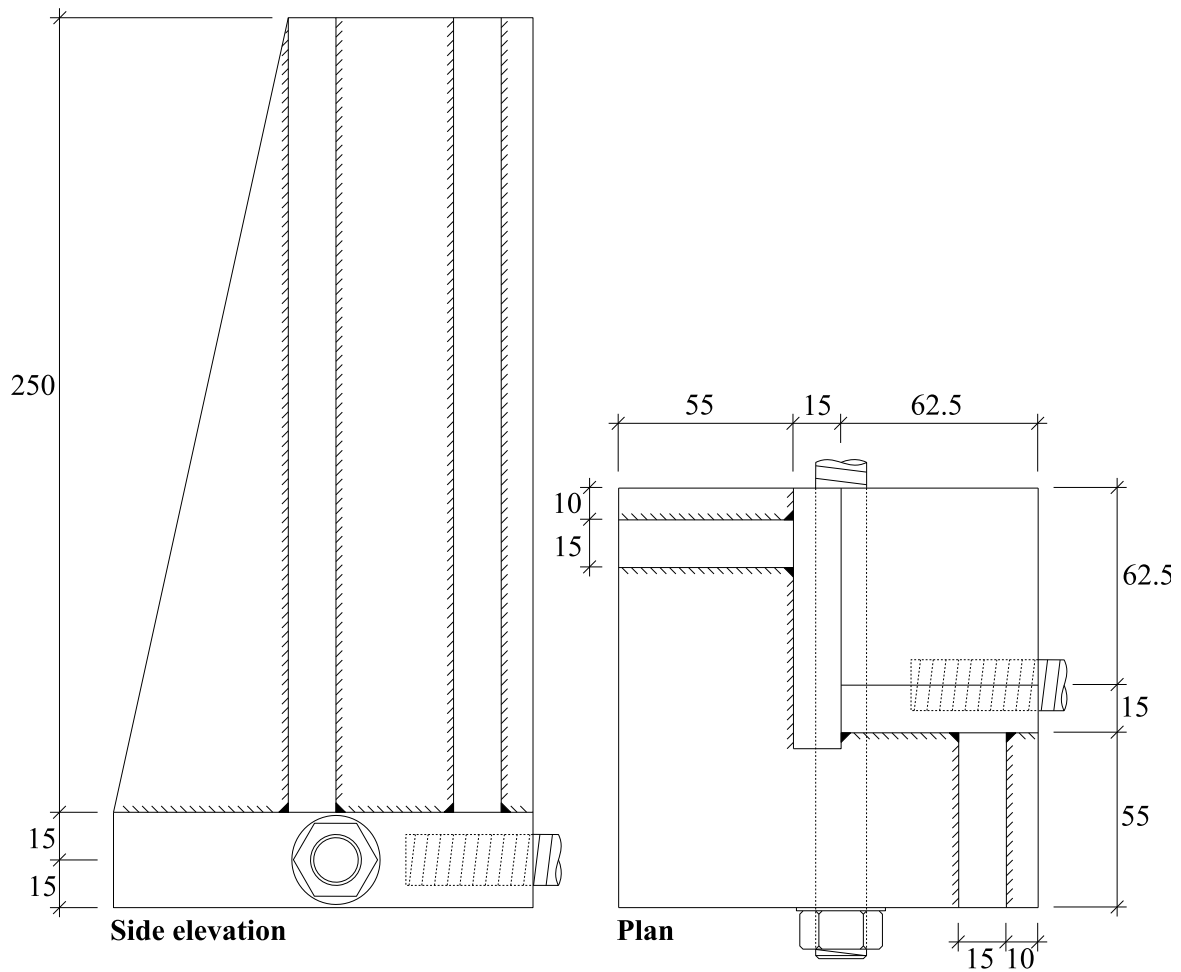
Corner support constructed from steel plates (all dimensions in mm).
